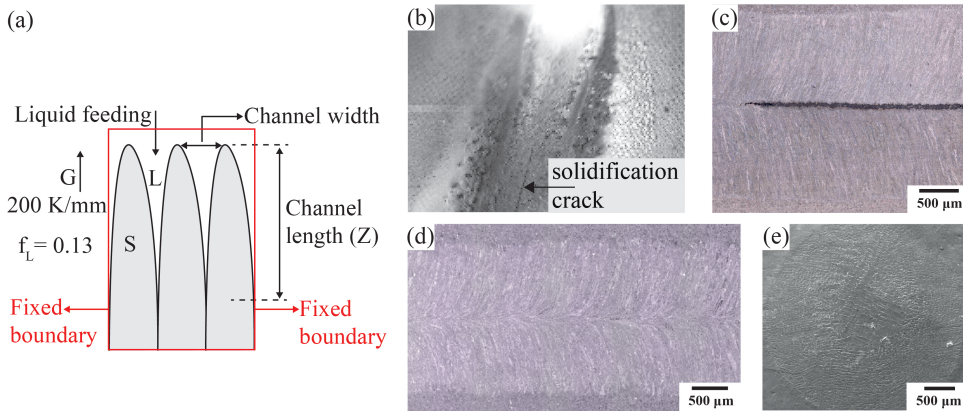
(a) Schematic illustrating the solidifying morphology and boundary conditions. Please refer to Figure 6.2 (c), (b) high-speed camera image taken during welding of TRIP steel showing solidification cracking, (c) optical macrograph of the weld surface of TRIP steel, (d) optical macrograph of the weld surface of the DP steel with 0.01 wt.% P and (e) secondary electron image of DP steel with 0.01 wt. % P after melt pool solidification.
